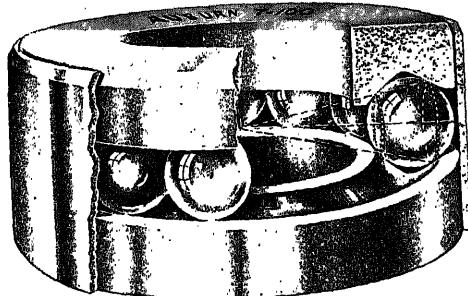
Thrust bearing. Auburn Ball Bearing Company, Rochester.
